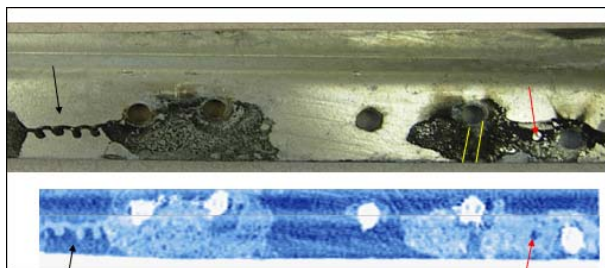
Section from a vehicle (30 mm x 100 mm) with embedded skips. Top image is after peeling; lower PA image is before. The spot welds are readily identifiable.
